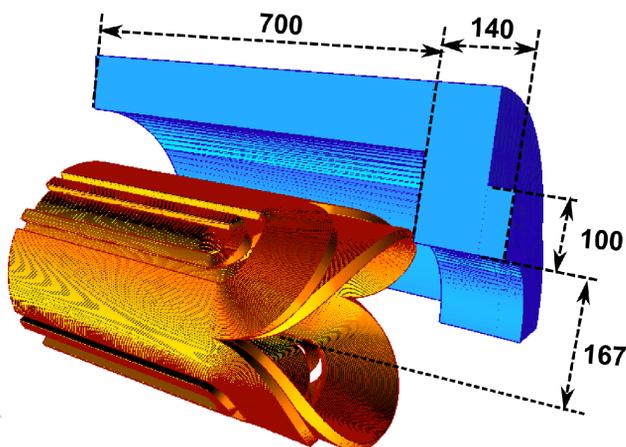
A design for the F magnet, showing half the magnet with dimensions in mm. Coils and an iron yoke are shown.
